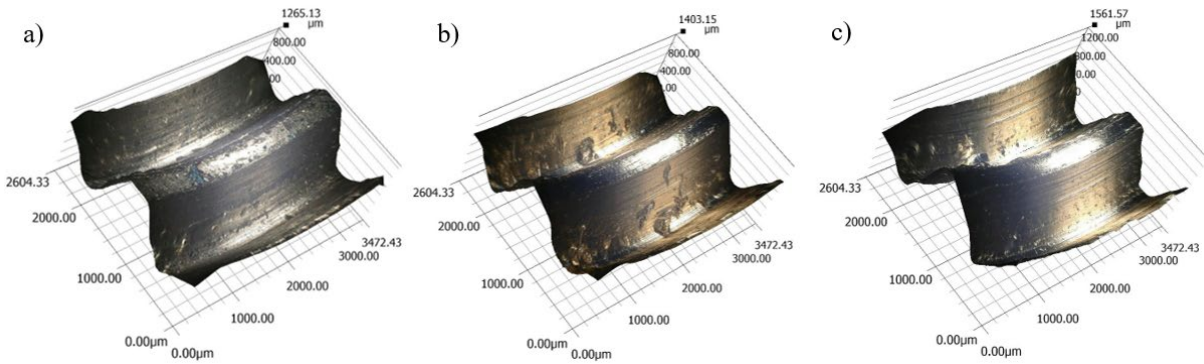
The cut threads on Ext.; a) CW617N, b) CW511L, c) CW724R.
